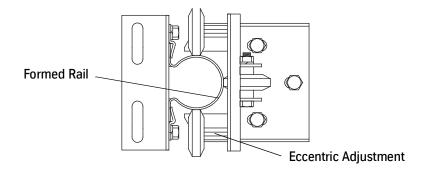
C12 & C7 Formed Rail Guide Shoe Assembly, 454BR
